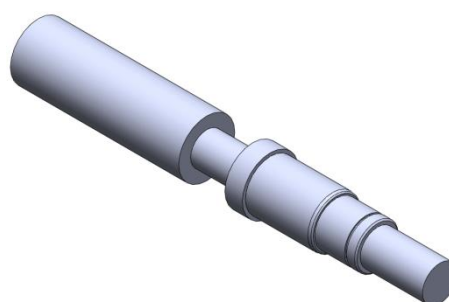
Initial 3D model of the guide spindle of the three-spindle screw pump with the feature *Extruded Boss/Base
